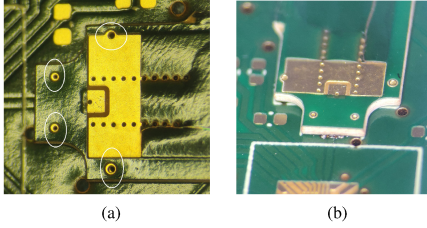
PCB to PCB interconnect evaluation for antenna assembly: (a) Top view with vias for alignment and (b) side view of gap between PCBs.
